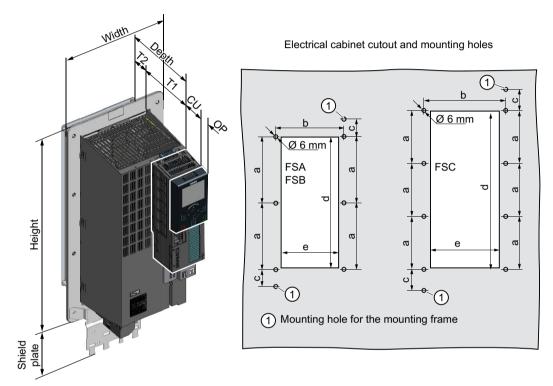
Dimension drawing and drilling dimensions for frame sizes FSA ... FSC
